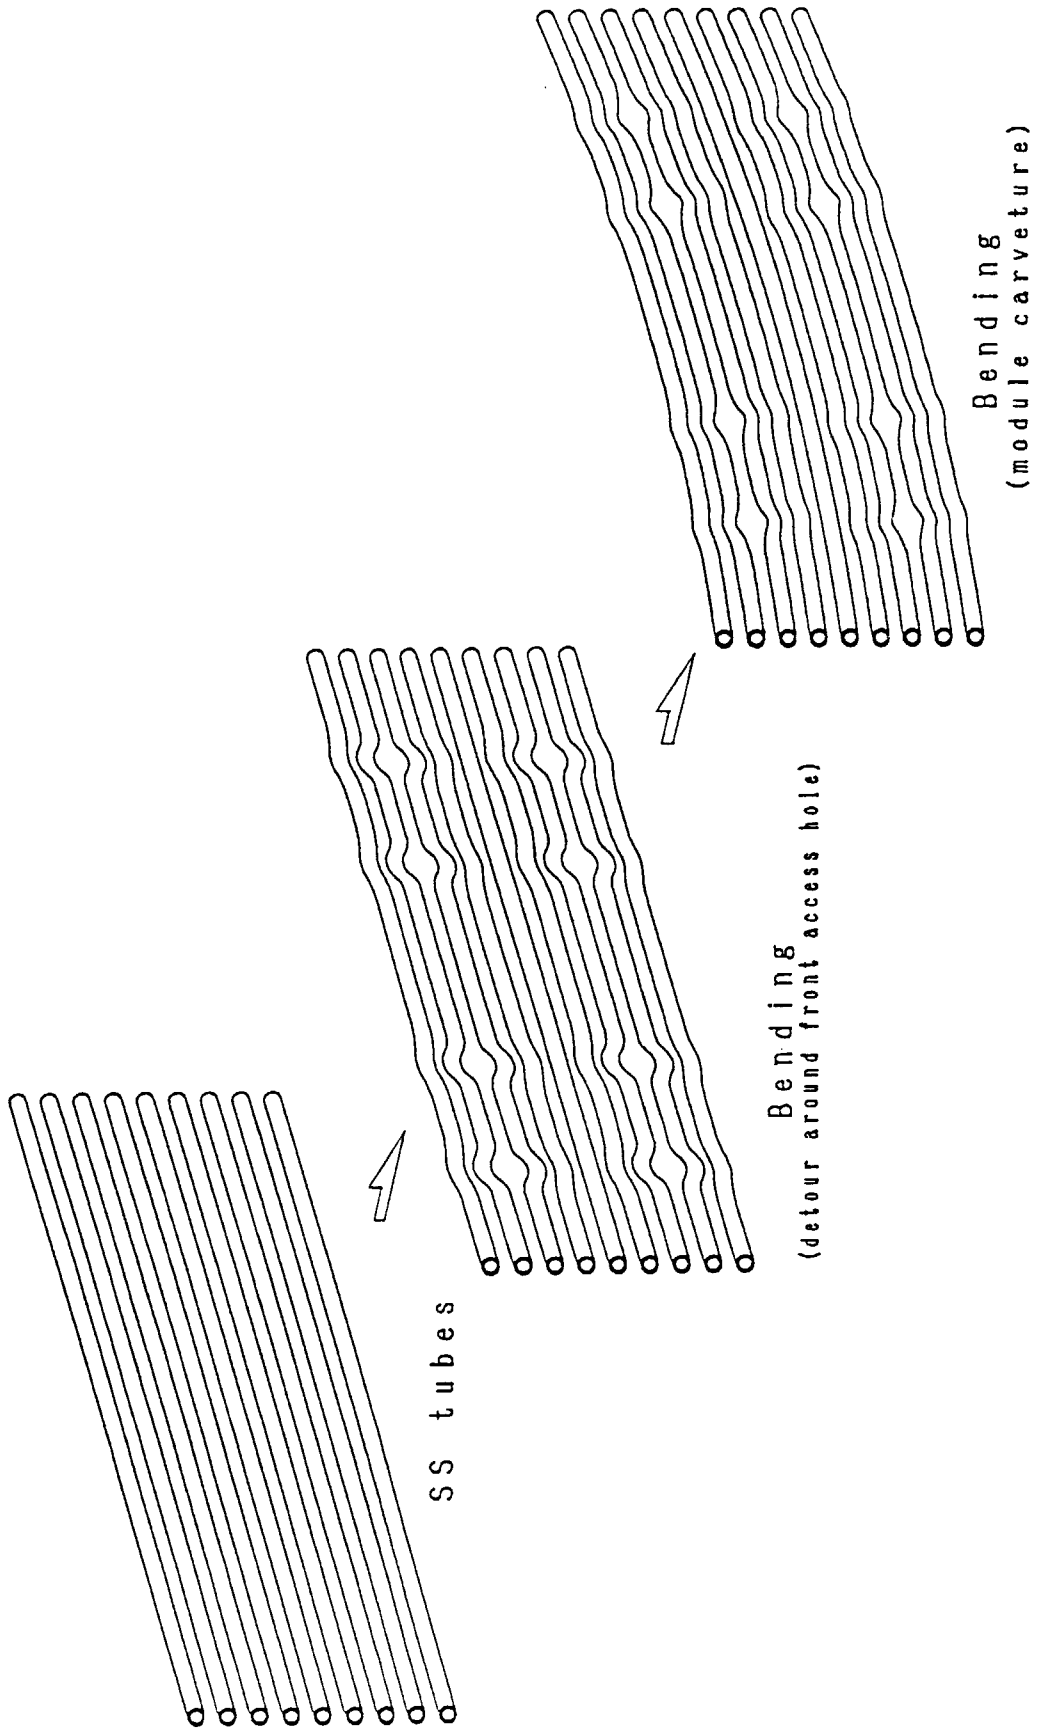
Fabrication of coolant channel tubes for shield block
